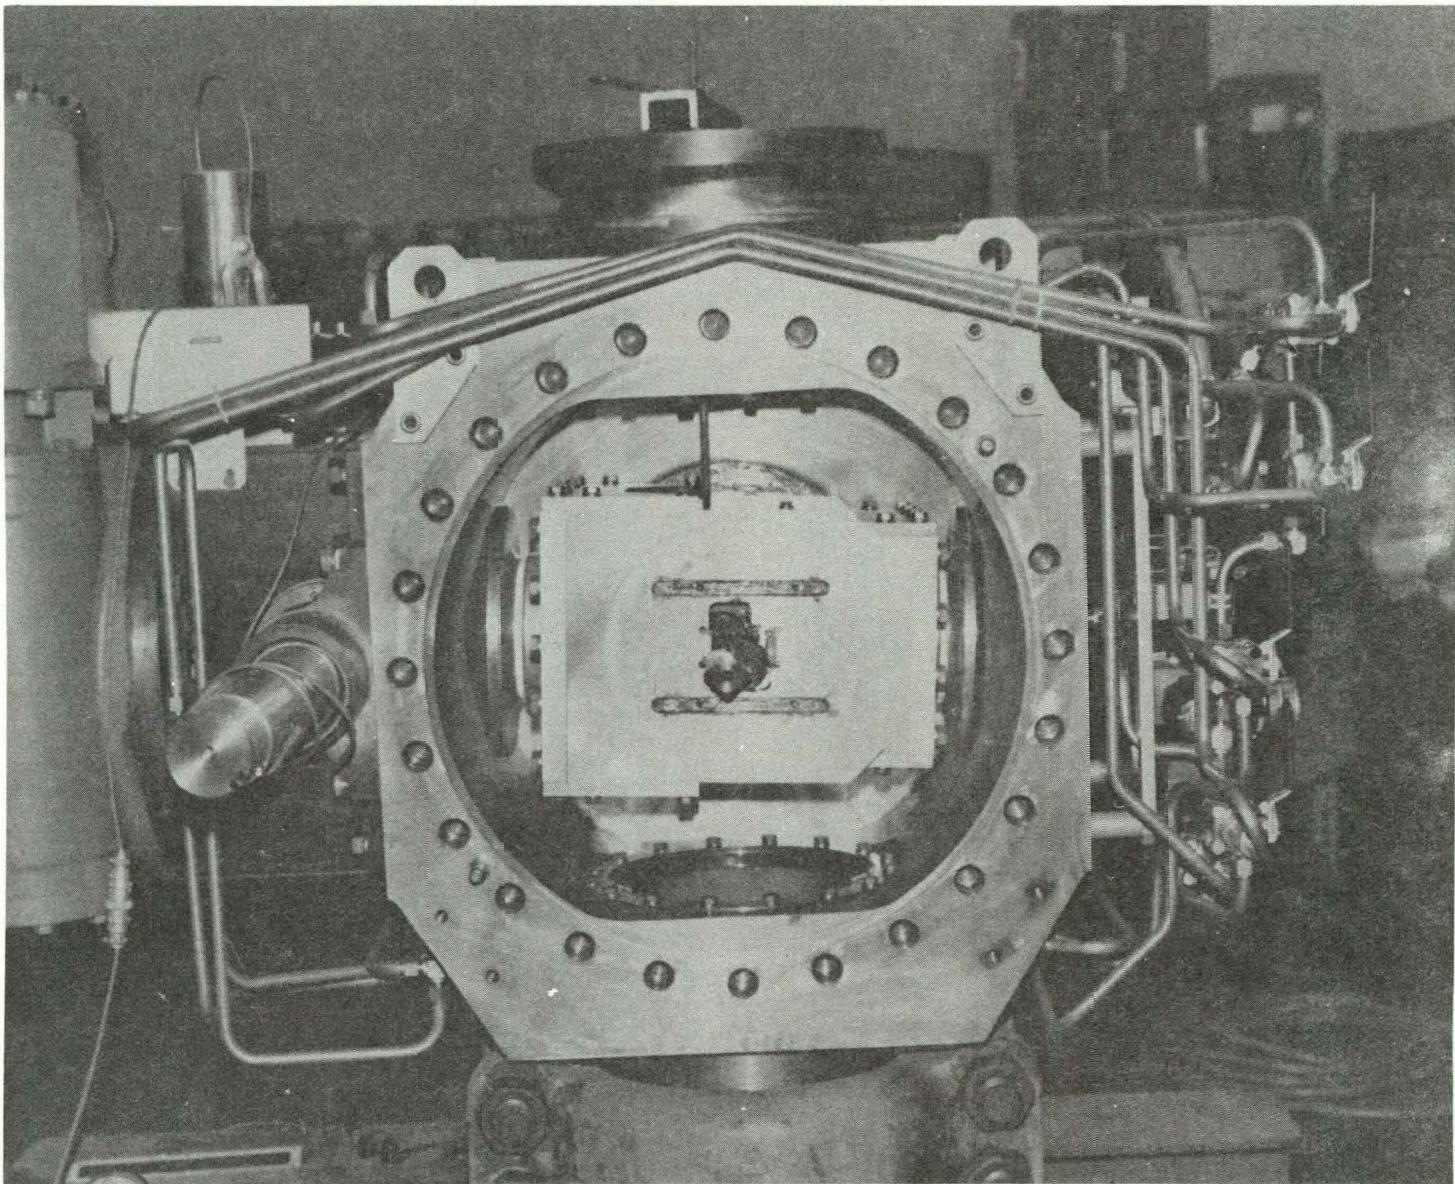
Internal Arrangement of Fairchild Type II Prototype Valve
